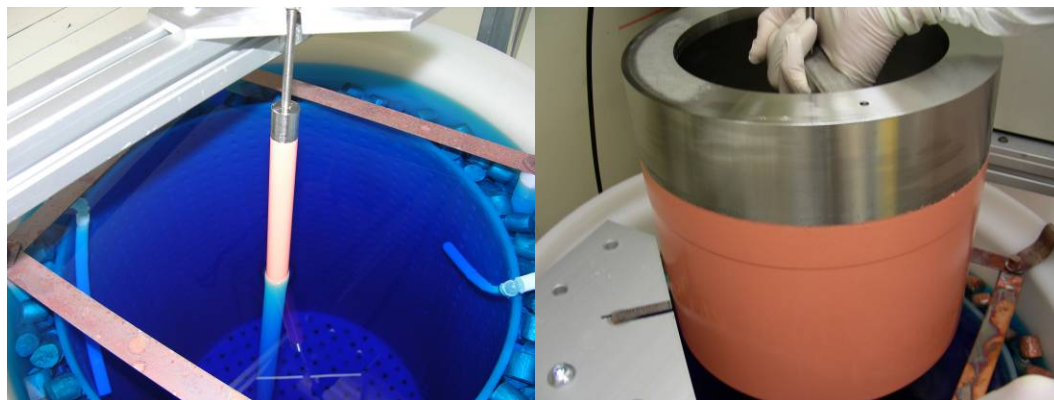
Electroforming the cold finger and one of the large-diameter parts for the first cryostat. These photographs are from early in the electroforming process—both parts have since been completed and sent on for machining.
